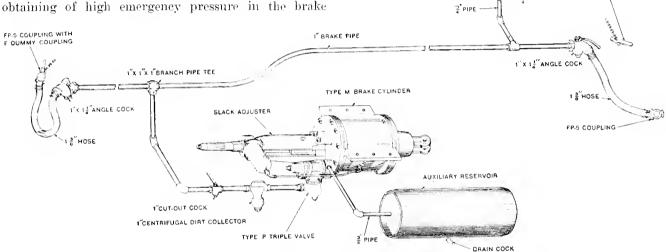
Elements of the Quick Action Automatic Brake (Standard PM Equipment)
